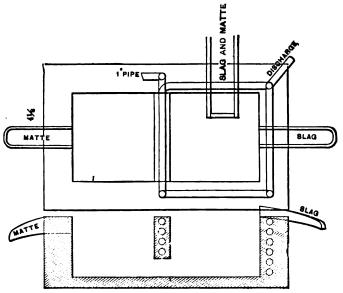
Plan and Section of Settler Used at Anaconda.
